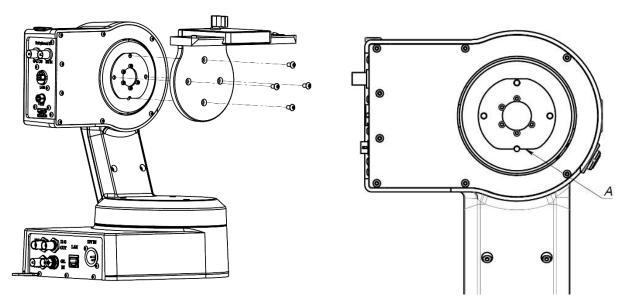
"Reversed" mount assembly for suspended camera mounting
